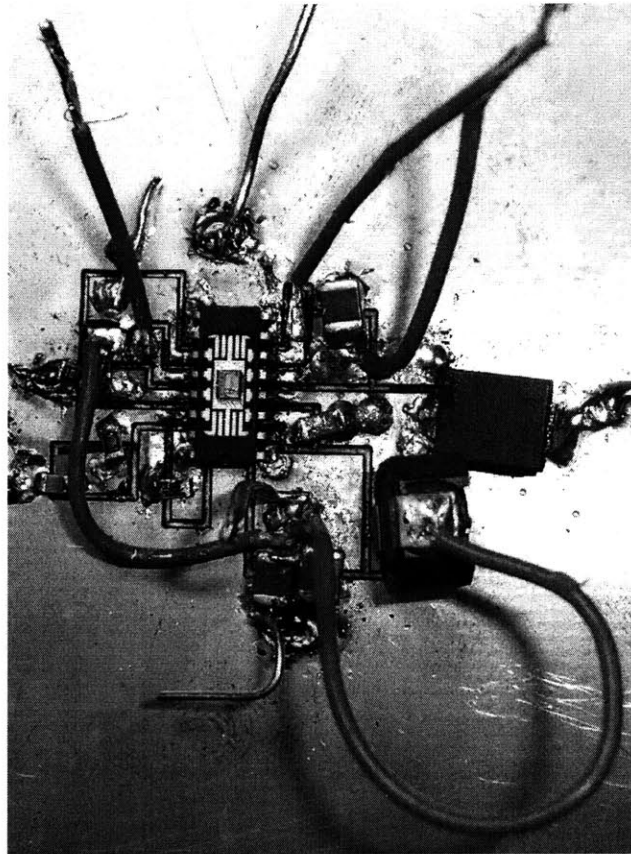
Picture of the board layout used for testing. The packaged die is open and unpassivated so that internal nodes can be probed and options can be accessed.
